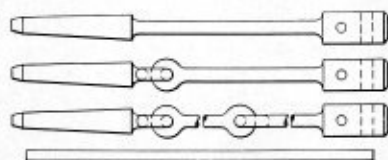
Straight, Single- and Double-Jointed Mandrels for Expanding Tubes. Turning Pin Is Also Shown
